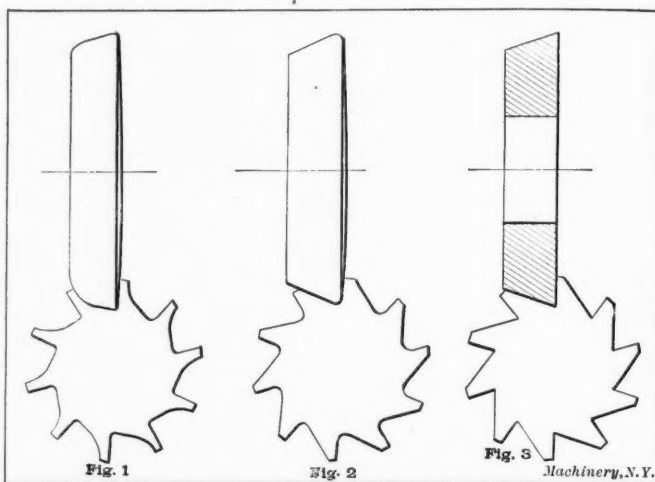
Illustration showing Reamer Tooth produced by a "Formed" Reamer Cutter
